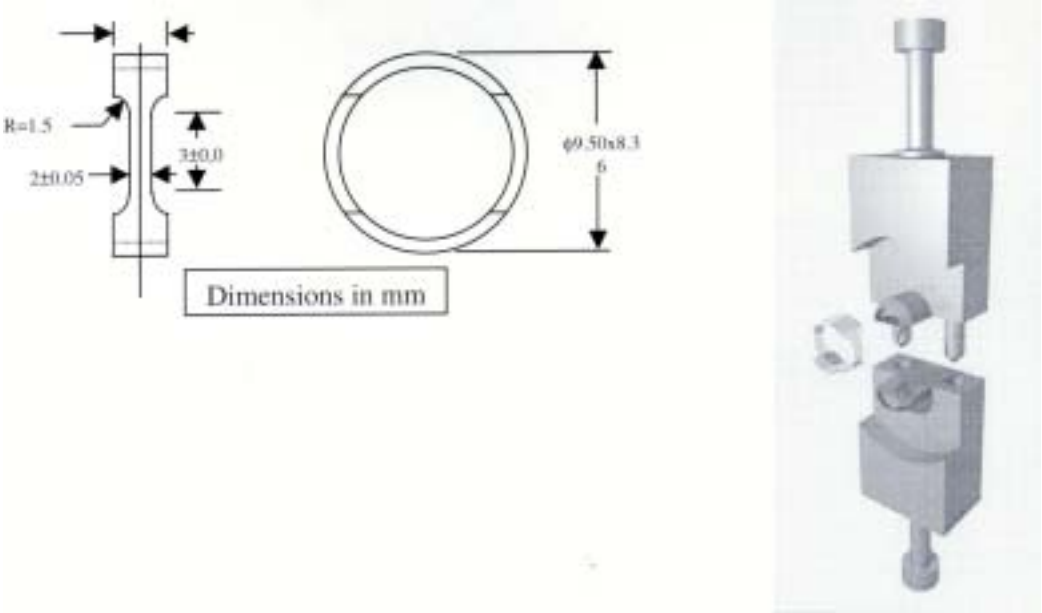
Ring specimen geometry and 3D view of the mandrel and ring test sample.
